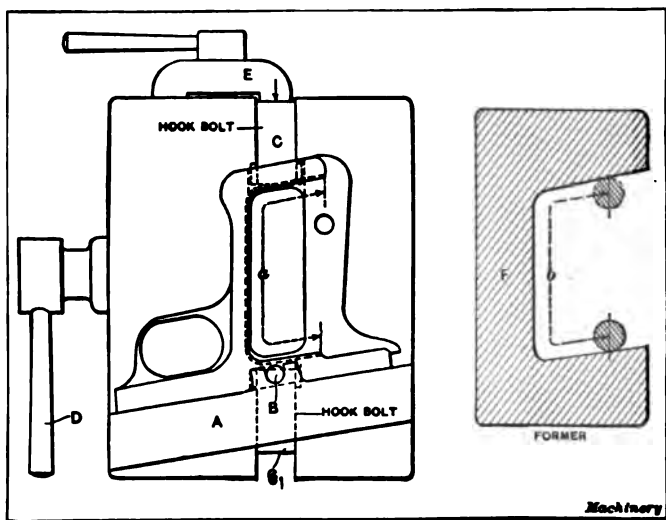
Fixture and Former for Profiling Dovetail Seat in Side of Pistol Frame
